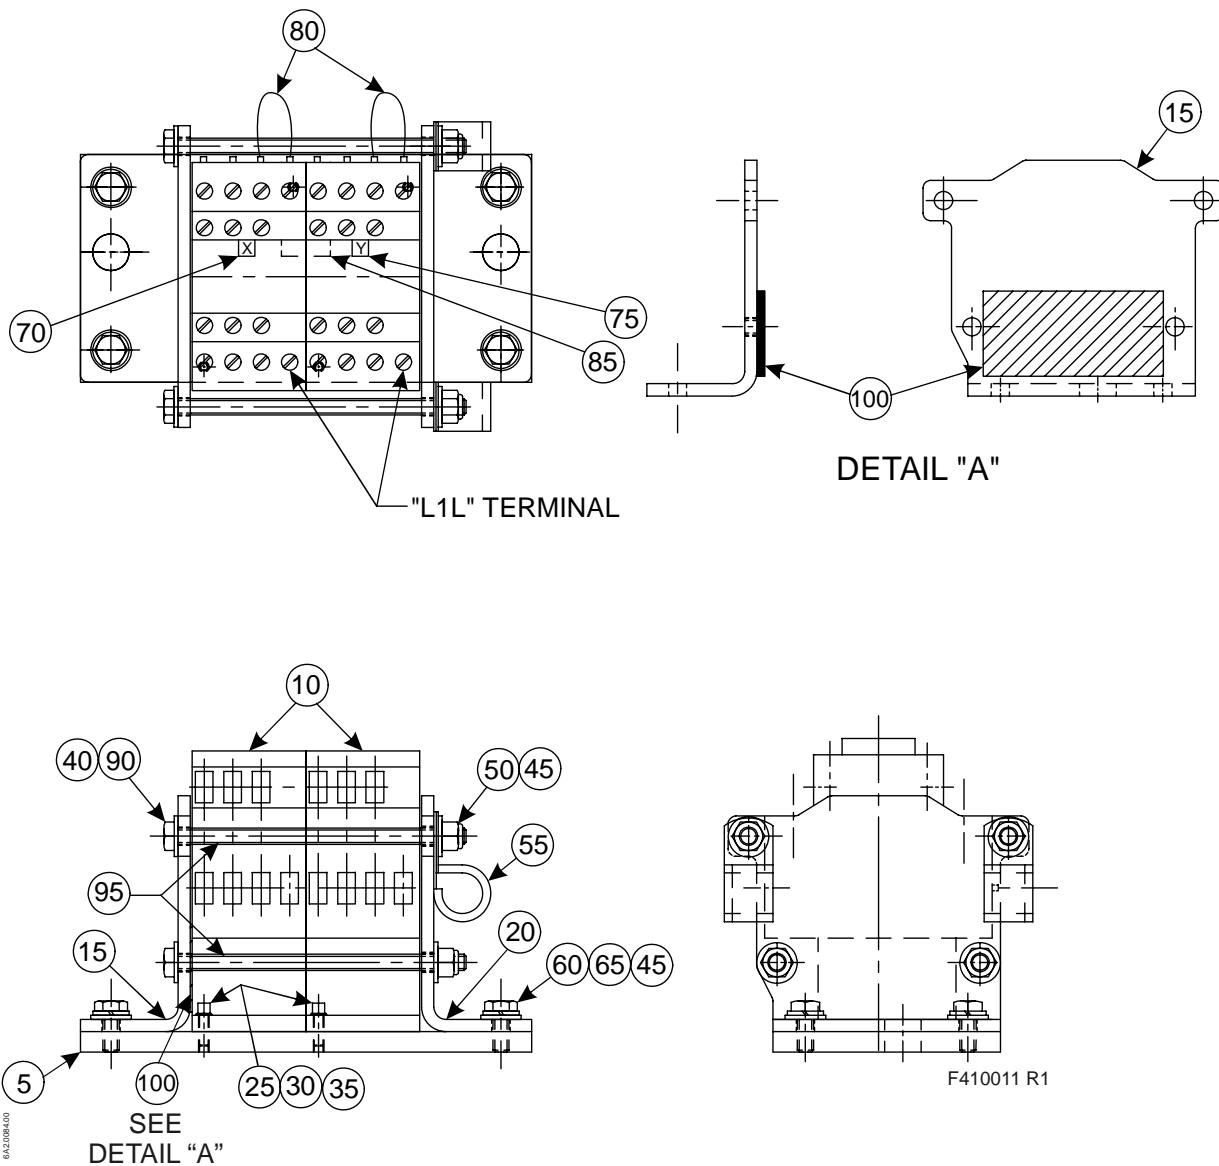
Contactor Assembly (N410011-01) Parts Location
